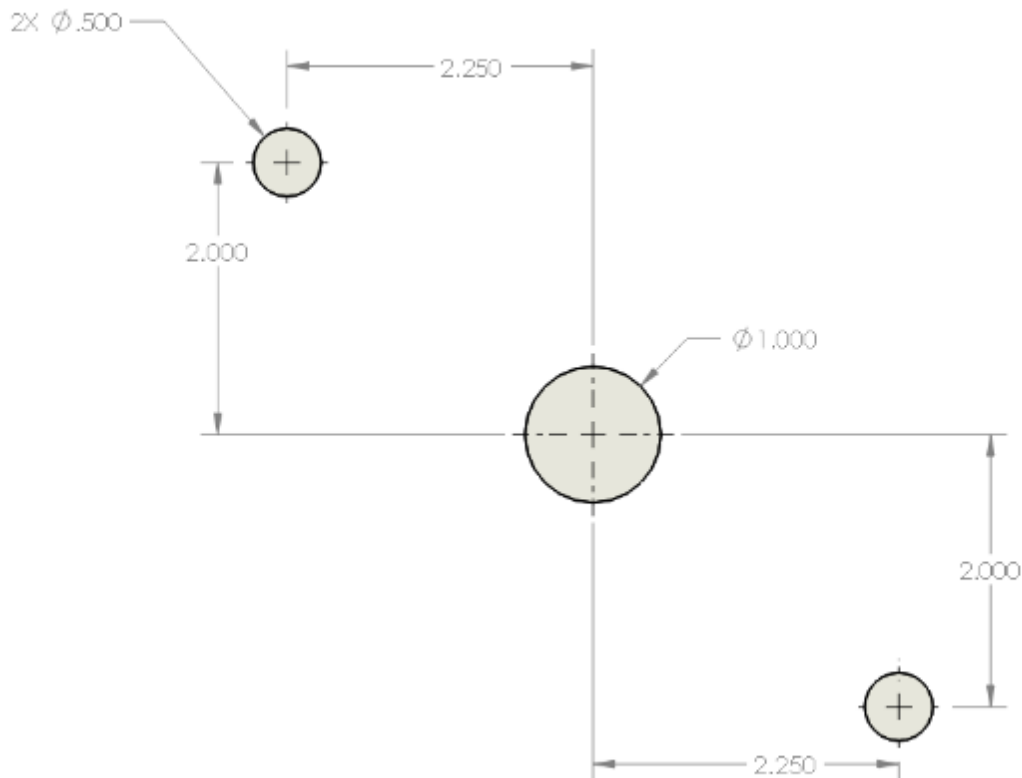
Schematic of drill pattern for 3 bracket mounted UADs.
